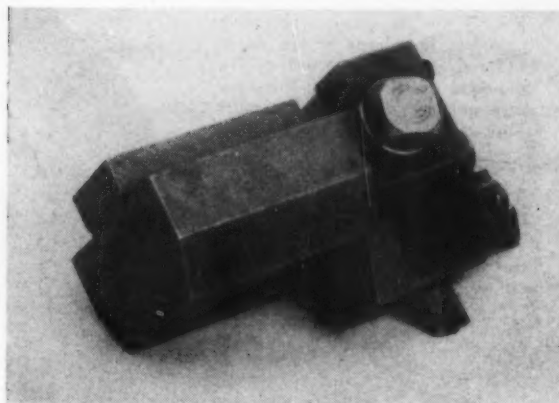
The dressing diamond is set in this holder and held by screws. Its height can be adjusted by screws.
